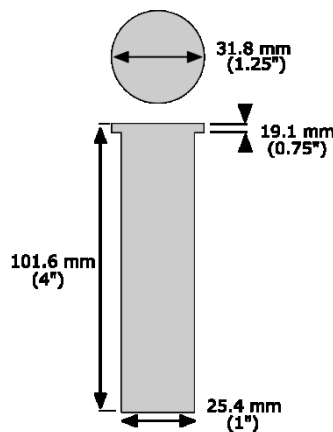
Specimen dimensions of the Grade 483 Q&T full sized Jominy end quench specimens.
